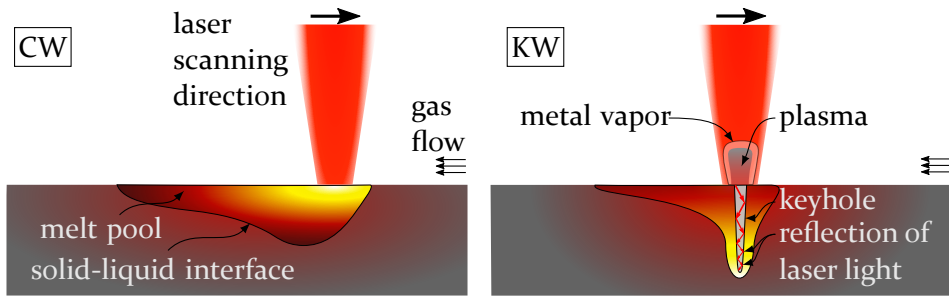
Sketch of conduction mode laser welding (CW) and keyhole welding (KW). CW is carried out at laser intensities where the surface temperature of the irradiated material remains below boiling temperature. In contrast, high laser intensities in KW lead to strong evaporation, which is associated with an emerging vapor plume and a forming vapor capillary (keyhole).
